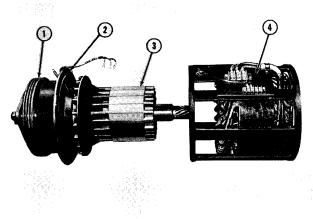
ROTOR AND BRAKE REMOVED 1. Brake 2. End Bell 3. Rotor 4. Stator
